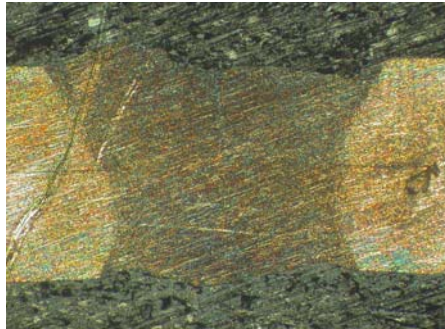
Optical image of the cross sectional view of a laser microweld after etching.
